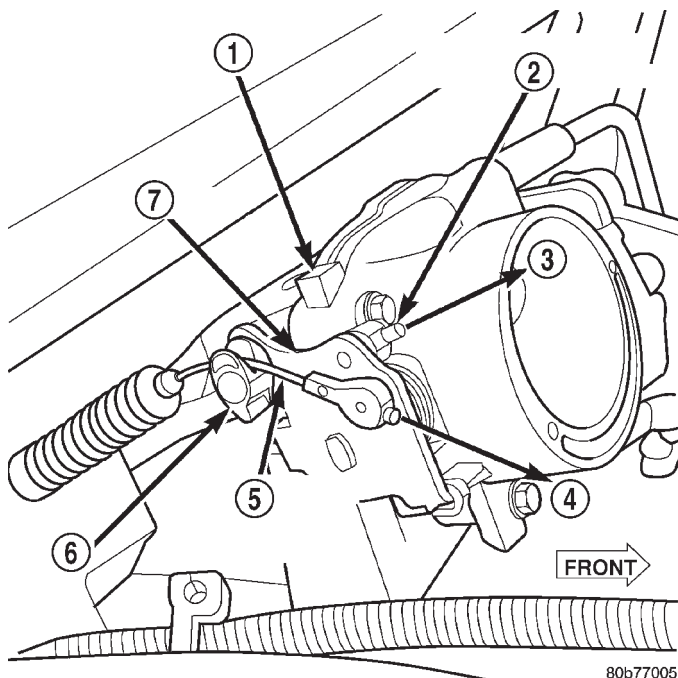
Cable Connectors at Bell Crank—4.7L V-8 Engine
